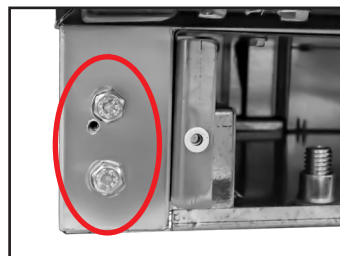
Move the bolts to the lower hinge bracket's original location.
